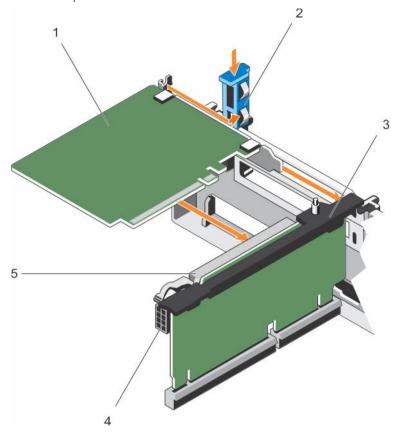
Installing an expansion card into the expansion card riser 2 or 3
